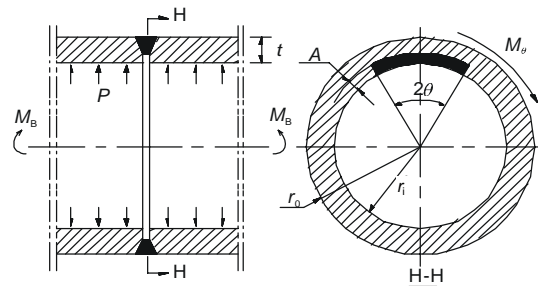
Structural diagram of pipe with incomplete welding defect
